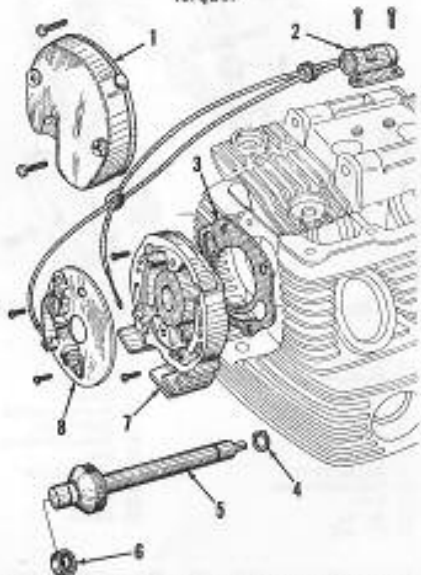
Exploded view of Type II ignition breaker assembly. The automatic ignition advance mechanism is between the valve camshafts. Refer to Fig. HN8-4 for legend.
